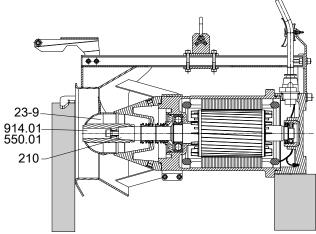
Mounting the axial propeller of an Amaline 300 with motor 8 6
